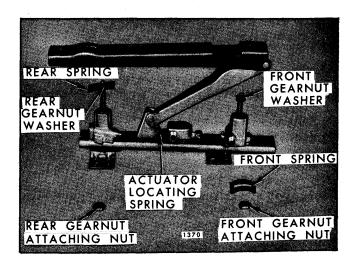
Six-Way Seat Adjuster - "B & C" Styles
